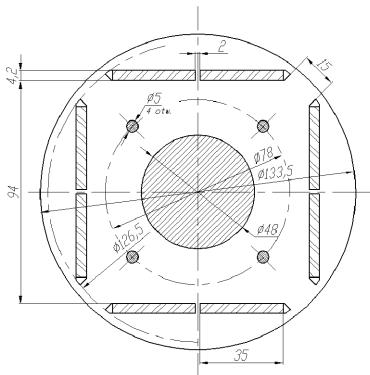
Dimensions of the rotor cross-section in the IPMSg 132 S4 PMSM machine
